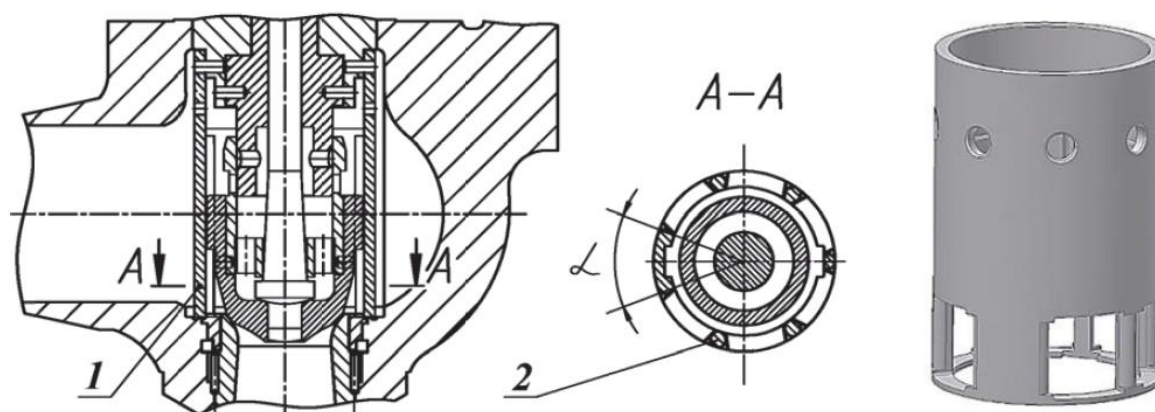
200 MW turbine governor valve with the cylindrical shell:
